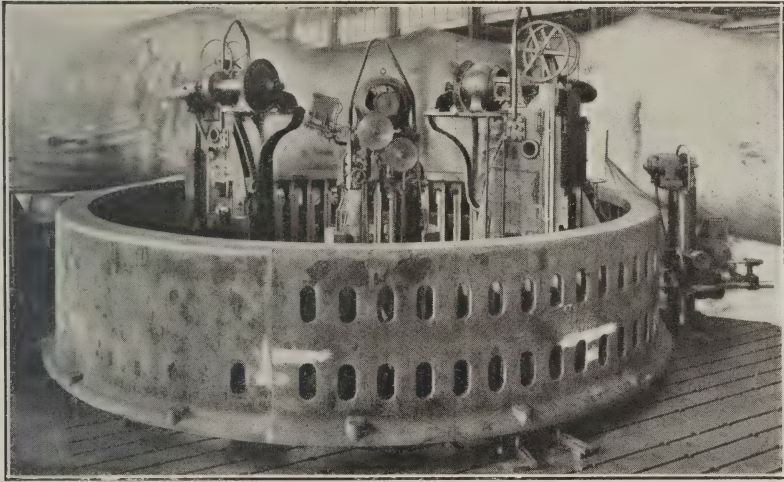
APPLICATION OF MOTOR TO MACHINE TOOLS ON IRON FLOOR PLATE
